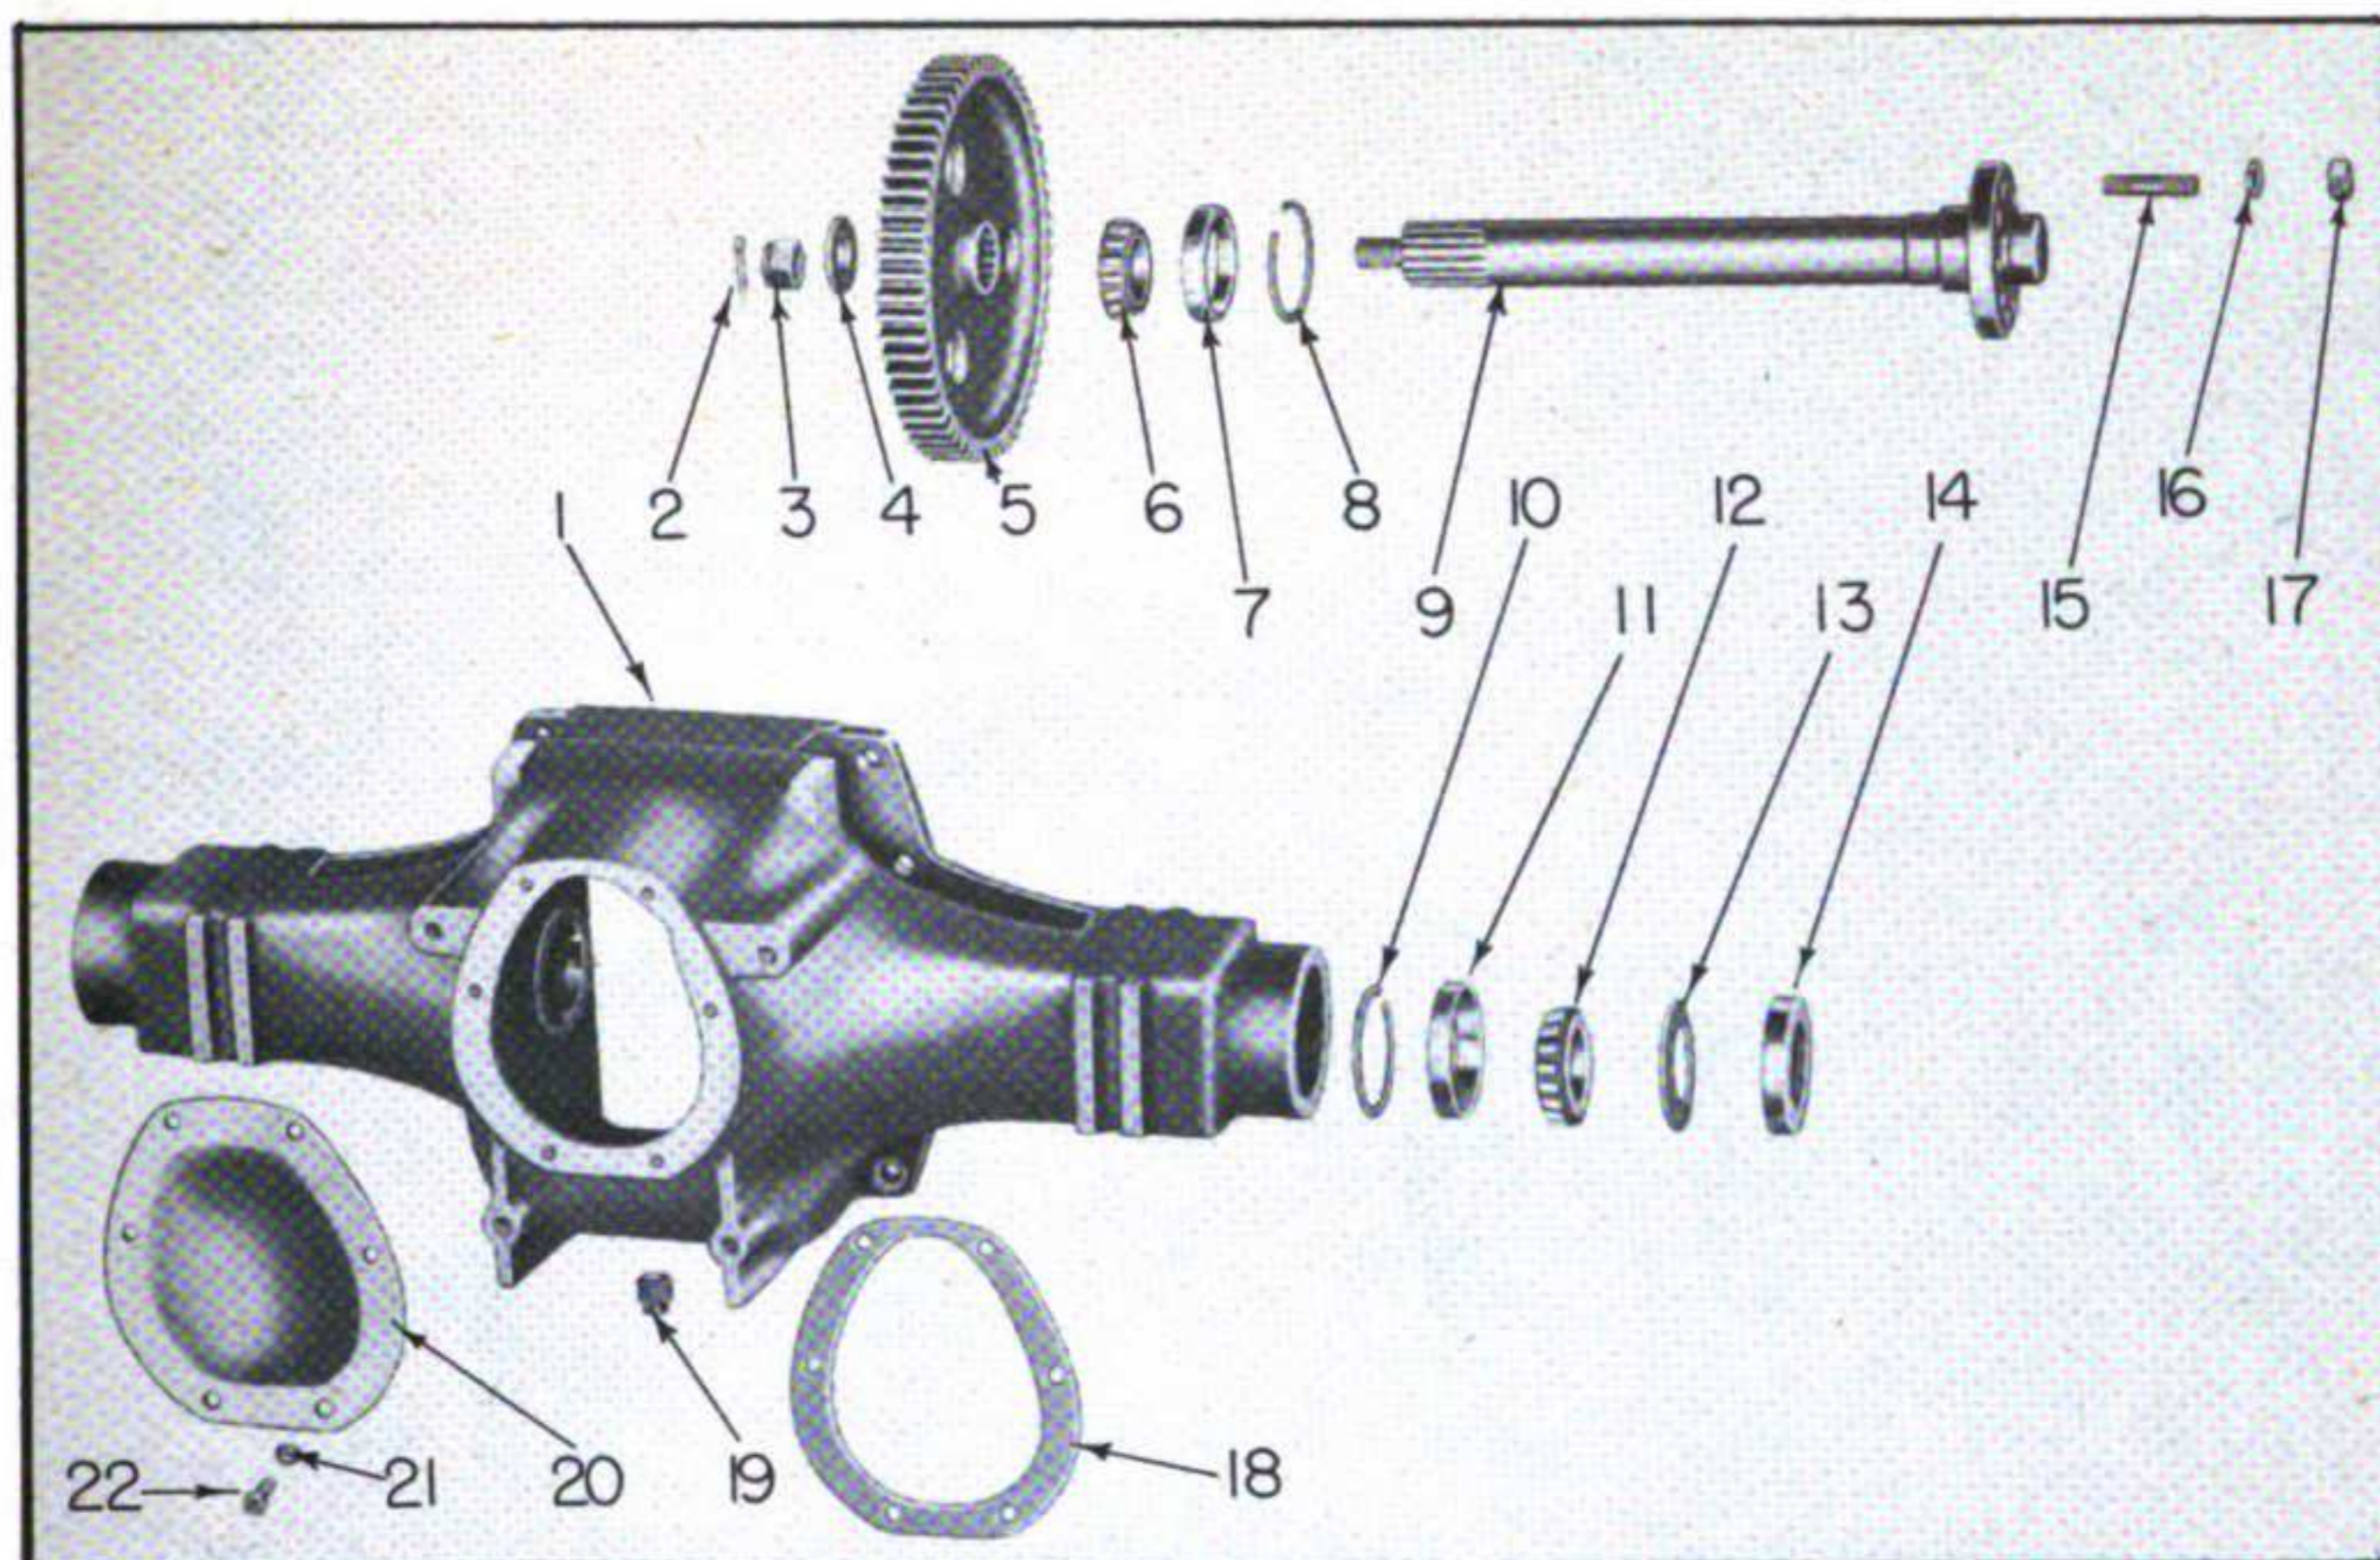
1101 REAR AXLE AND HOUSING
